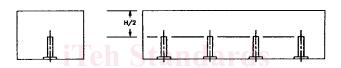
Typical Distance-Amplitude Reference Block Configuration for the Ultrasonic Examina Testiong of Large Metal and Metal Alloy Bars of from 1 to 10 in.-{_(25.4 to 254.0 mm]) Diameter and Larger
